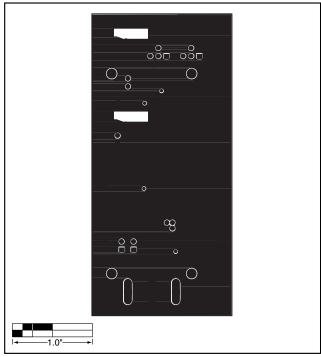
MAX3266 EV Kit PC Board Layout—Ground Plane
